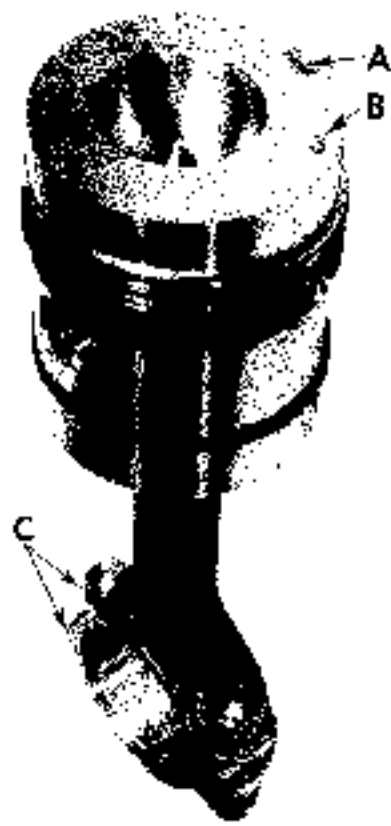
Assemble rod and piston units as shown. A. FRONT or P mark. B. Cylinder number. C. Connecting rod and piston marks.
